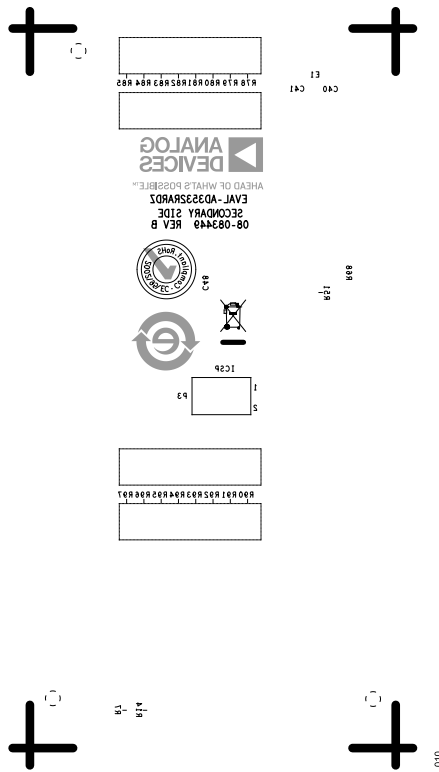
EVAL-AD3532RARDZ Bottom Side Component Placement
